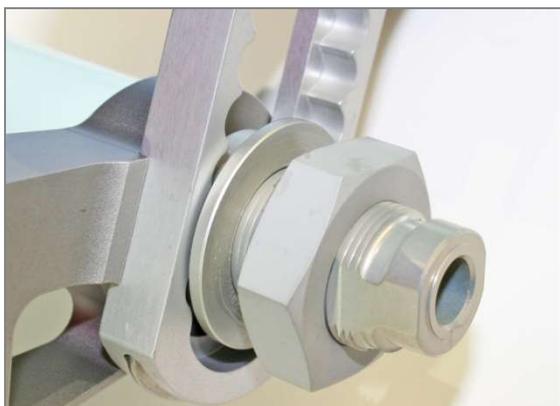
Axle tube fixed in position with position gate (view from outer side of product)
